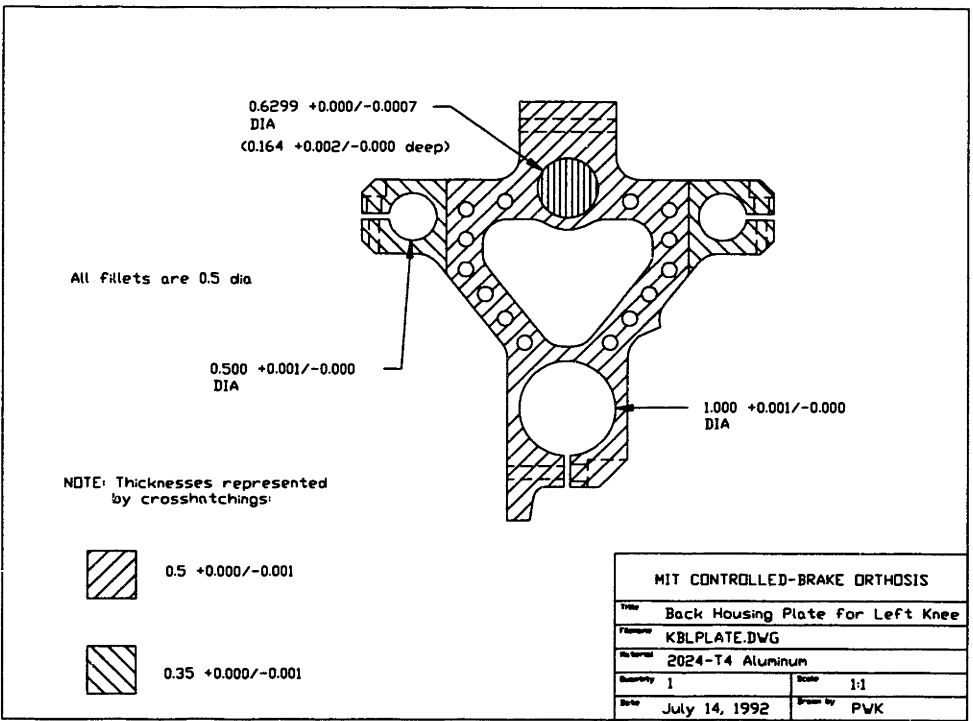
Back plate for left knee gear housing (drawing 1 of 2).
